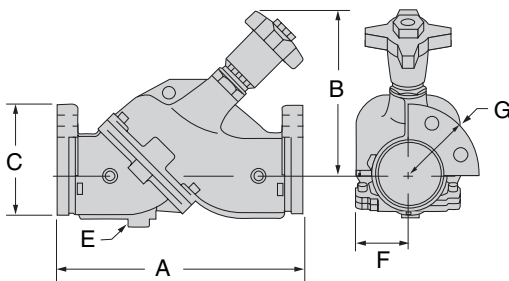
FIGURE GBV-G GROOVED-END STRAIGHT BALANCING VALVES DUCTILE IRON, GROOVED-END OR FLANGED-END STRAIGHT
